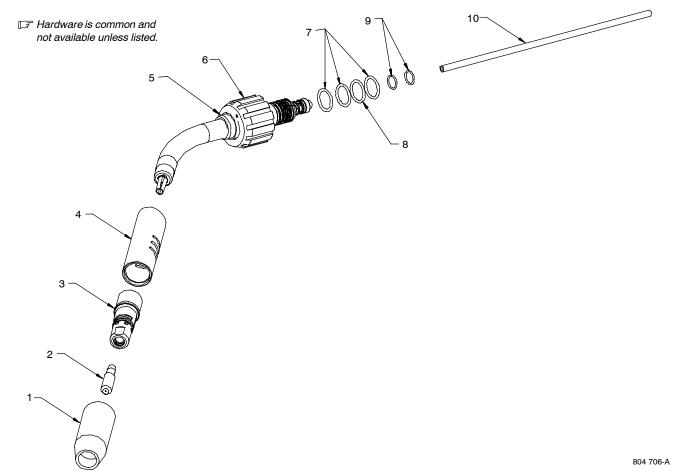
(Water) Head Tube Assembly Of Aluma-Pro Gun
